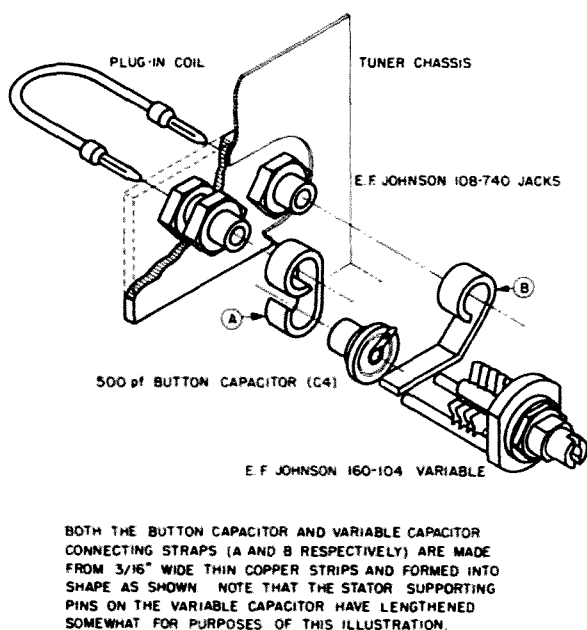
Exploded view of the connections between the 6CW4 and the coil socket.
